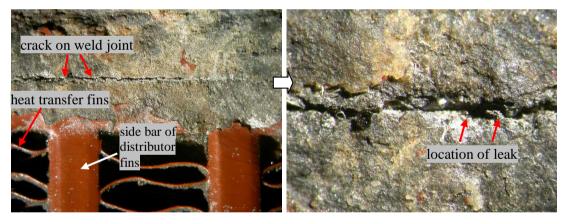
Close up view of the corroded surface around the weld joint of the leaked compressor after-cooler.
